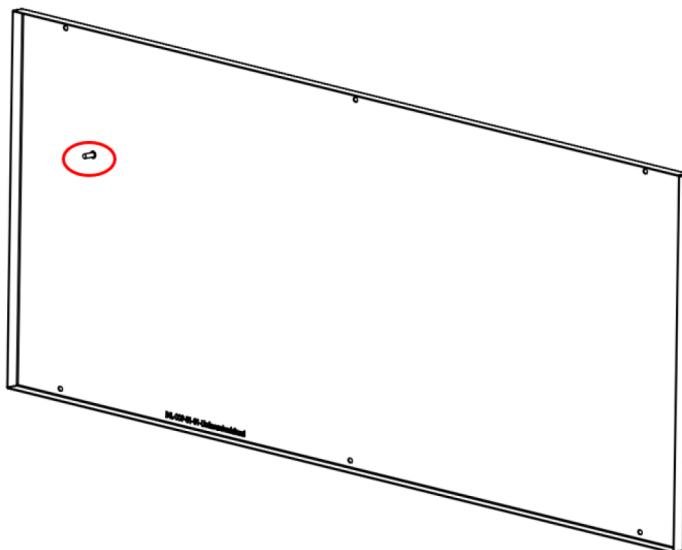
Bolts for attaching the equipotential bonding to the sheet metal covers
